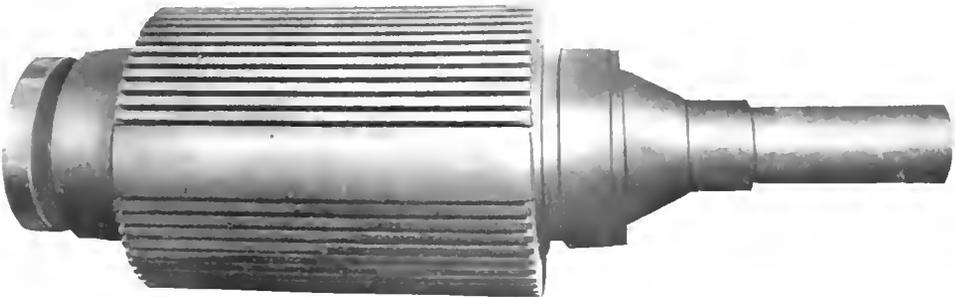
Rotor of Four-Pole Turbine-Driven Alternator, Consisting of a Single Machined Forging
